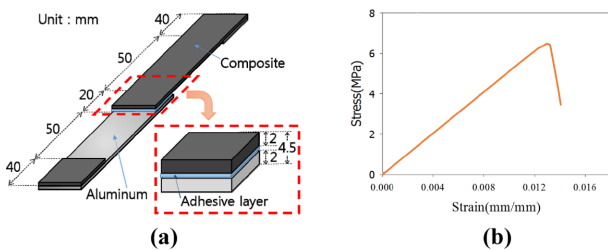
Single lap joint bonding test; (a) shape and dimension of the specimen, (b) representative bonding strength test result
